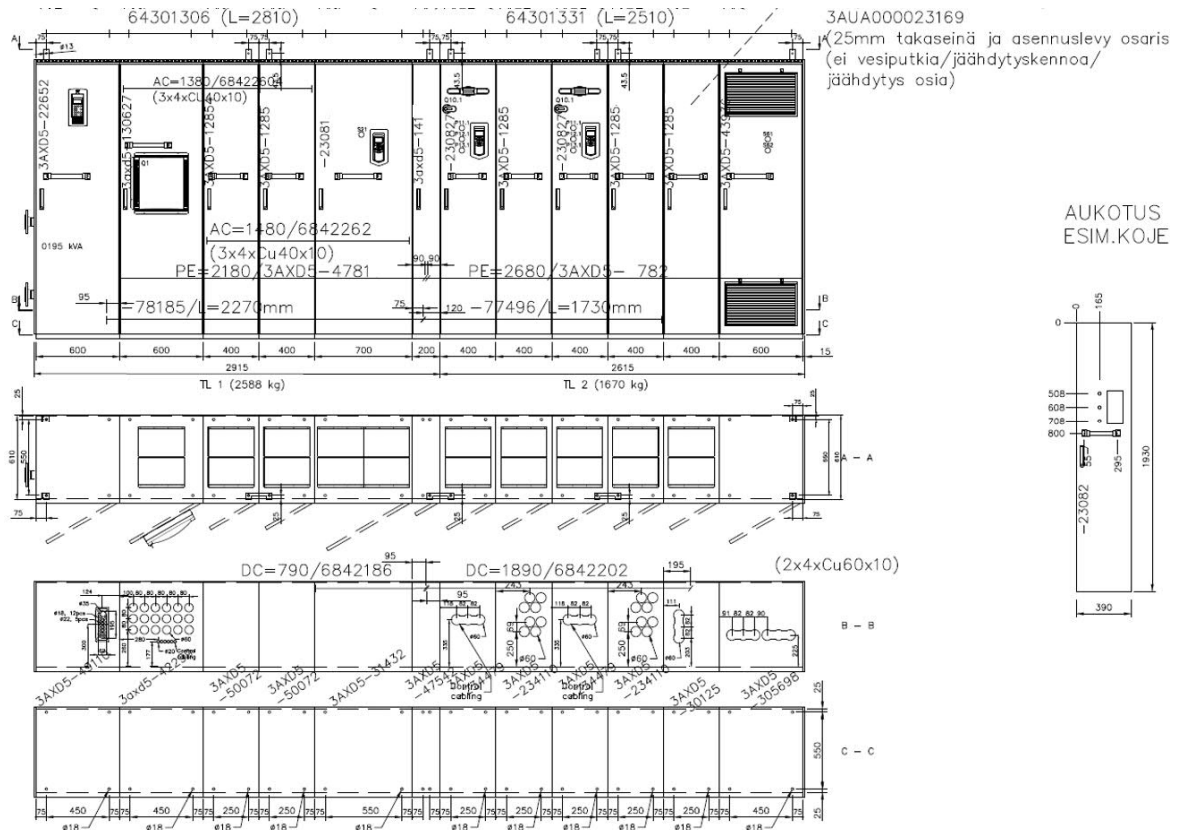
Manufacturing drawing. All texts with the larger text type are added to a dimension drawing when the manufacturing drawing is prepared.
